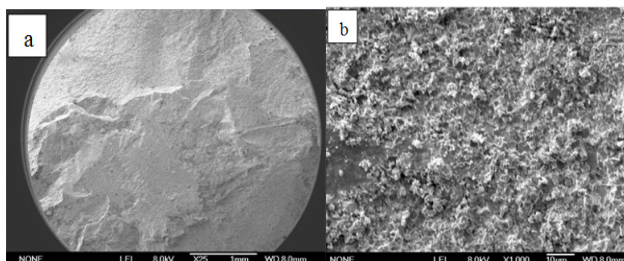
Fracture surface of tool pin (a. macroscopic appearance of fracture; b. fracture morphology)
